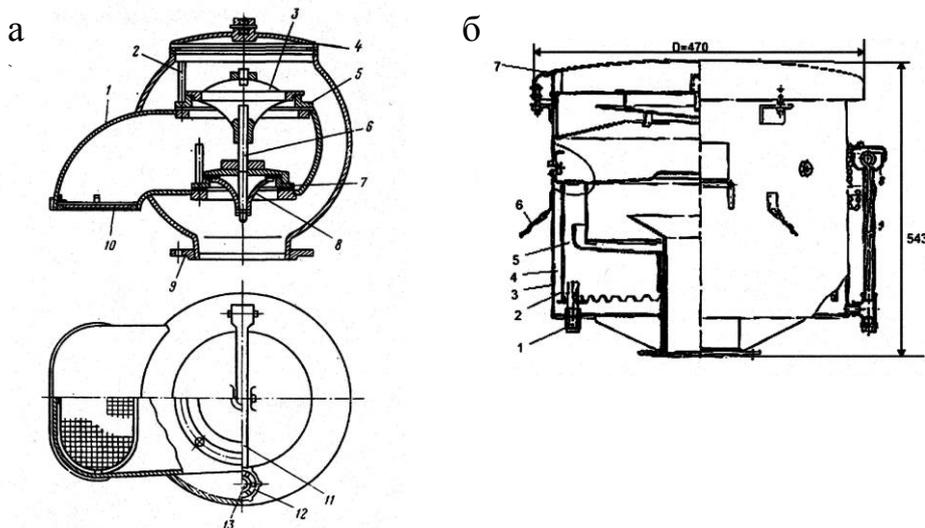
Pressure vent valve: a) Breathing valve BV – 2, b) PSV Pressure safety hydraulic valve [2]
